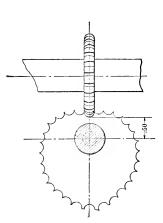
Position of Cam and Cutter when Commencing to Mill
